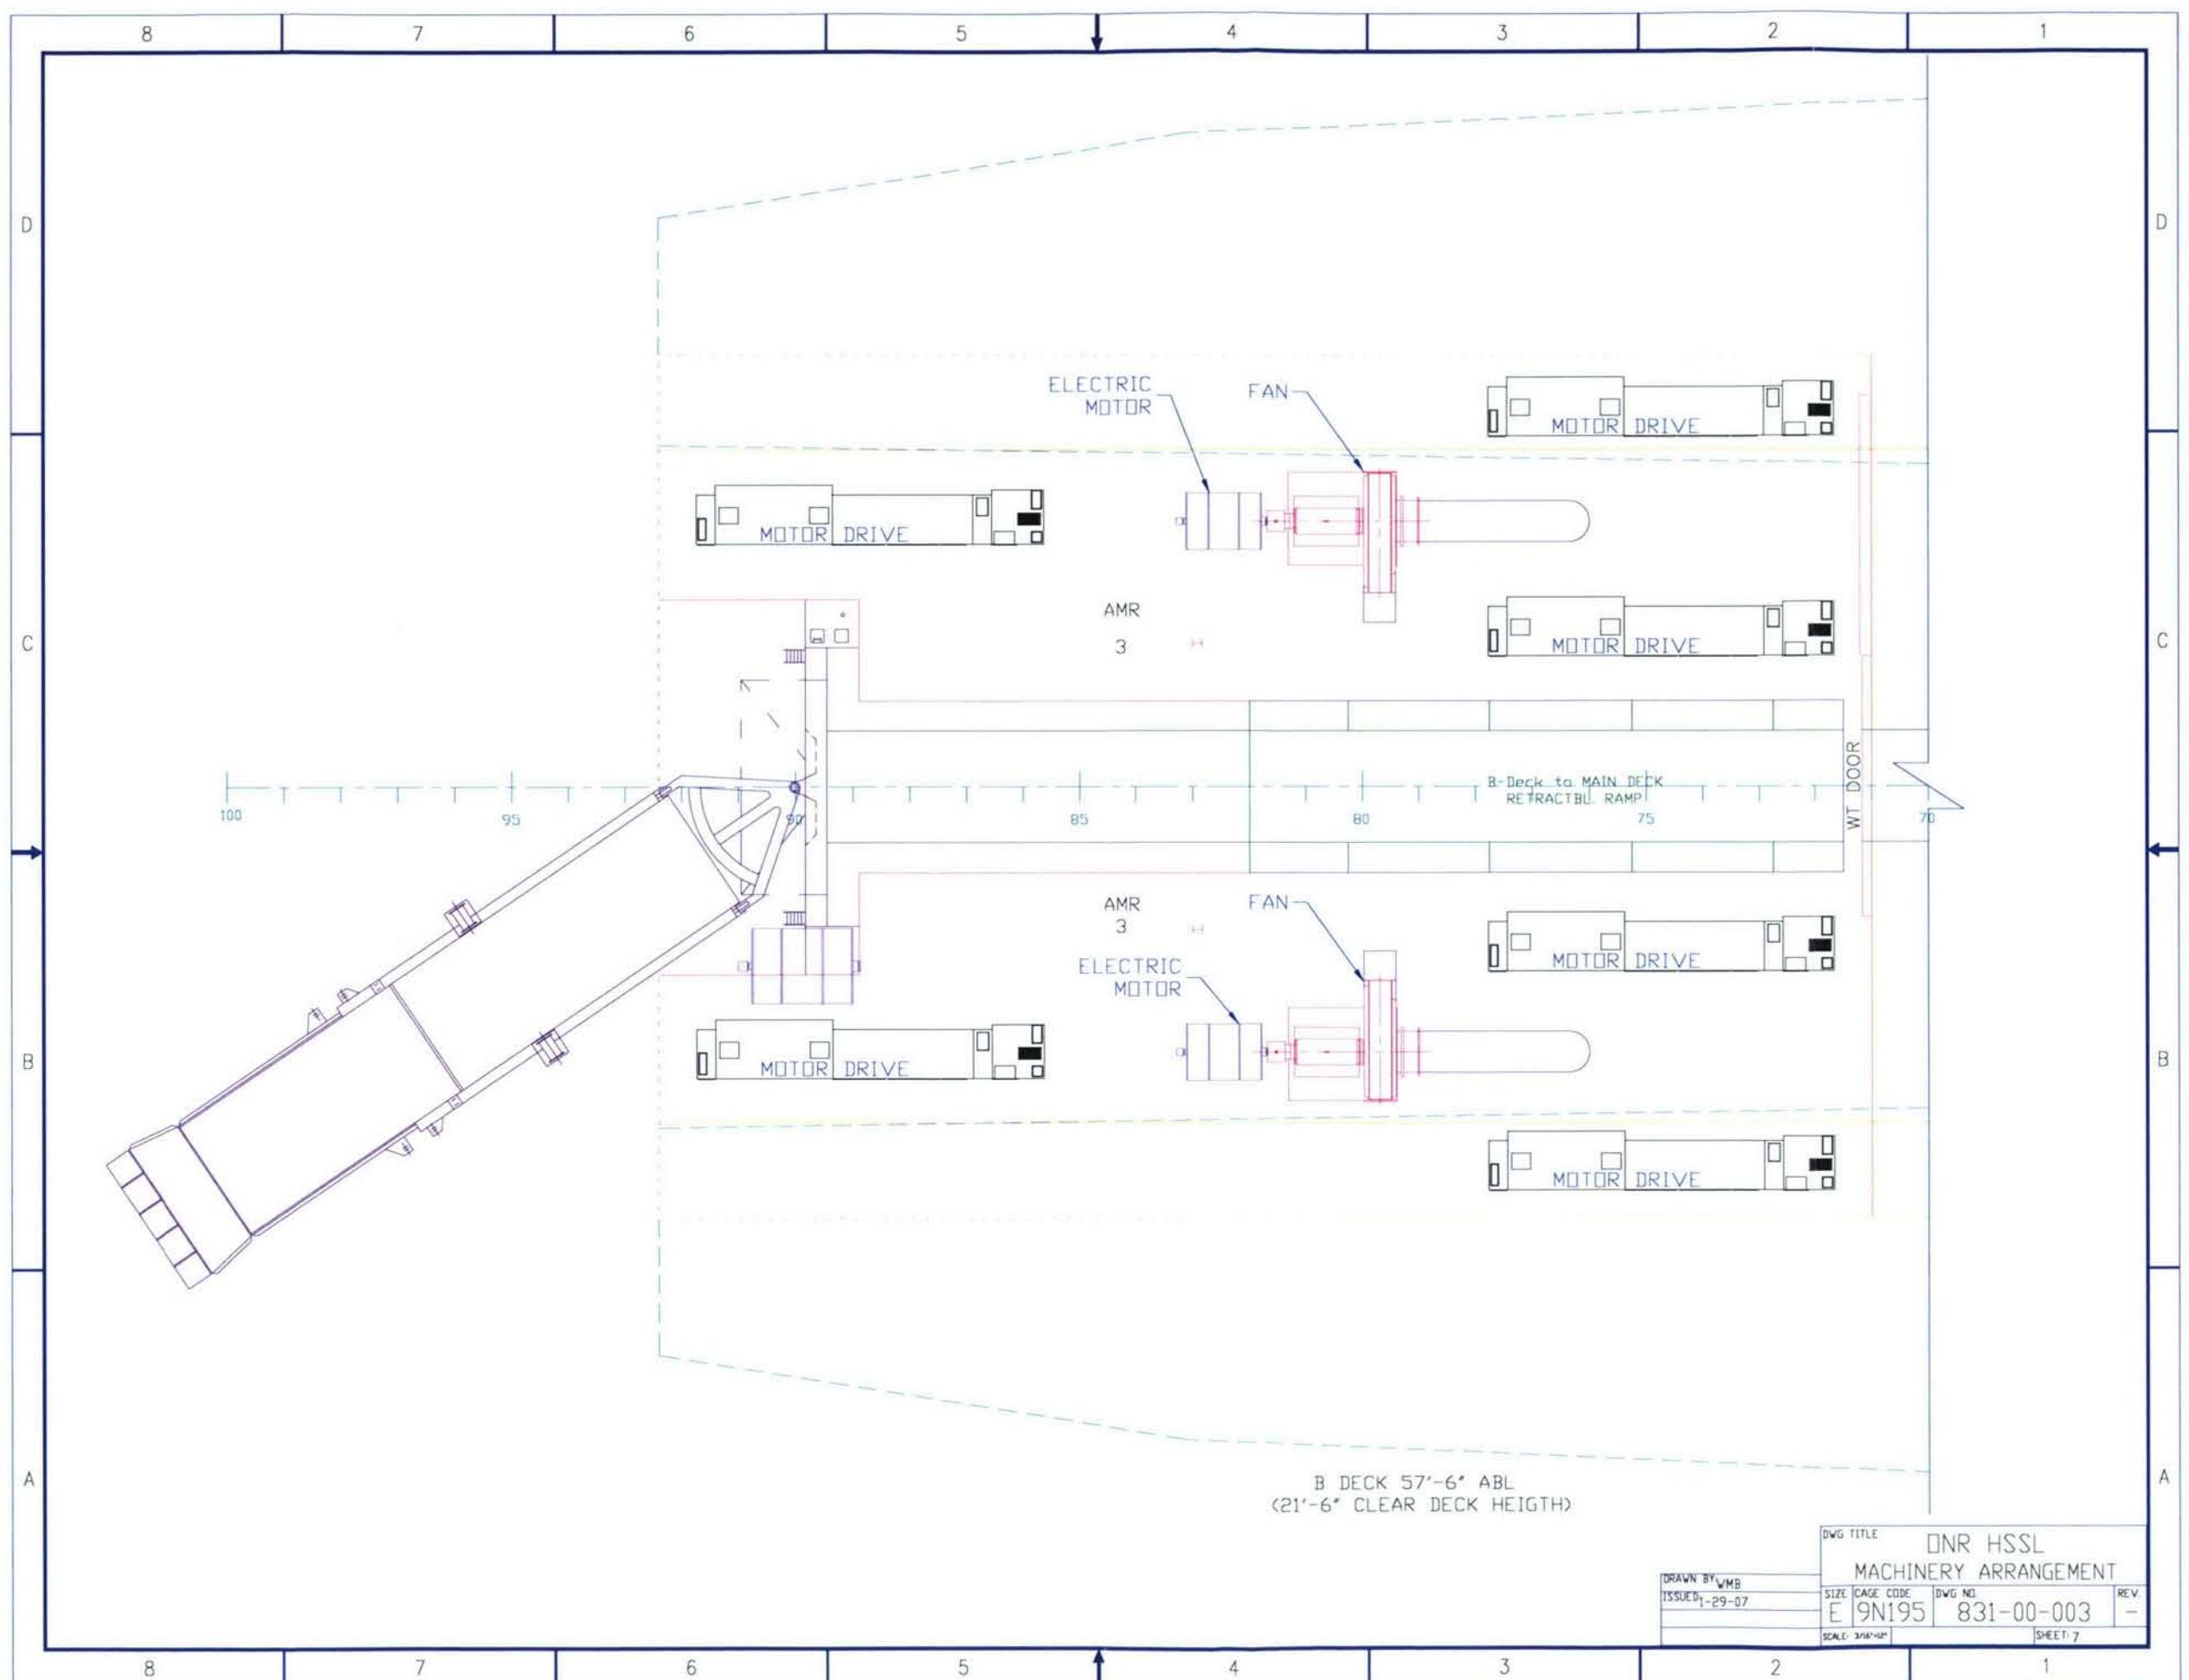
Plan View of Aft Auxiliary Machinery Room (AMR #3)
